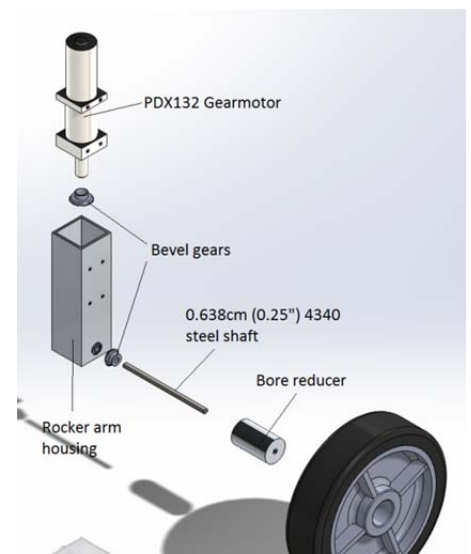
Exploded view of the drive system to illustrate placement of motor inside the rocker arm
